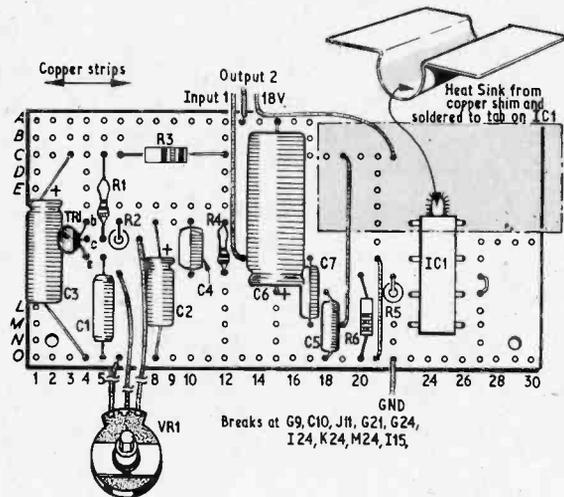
Layout of the components on the amplifier board. The copper heatsink is carefully soldered to the i.c. tab
